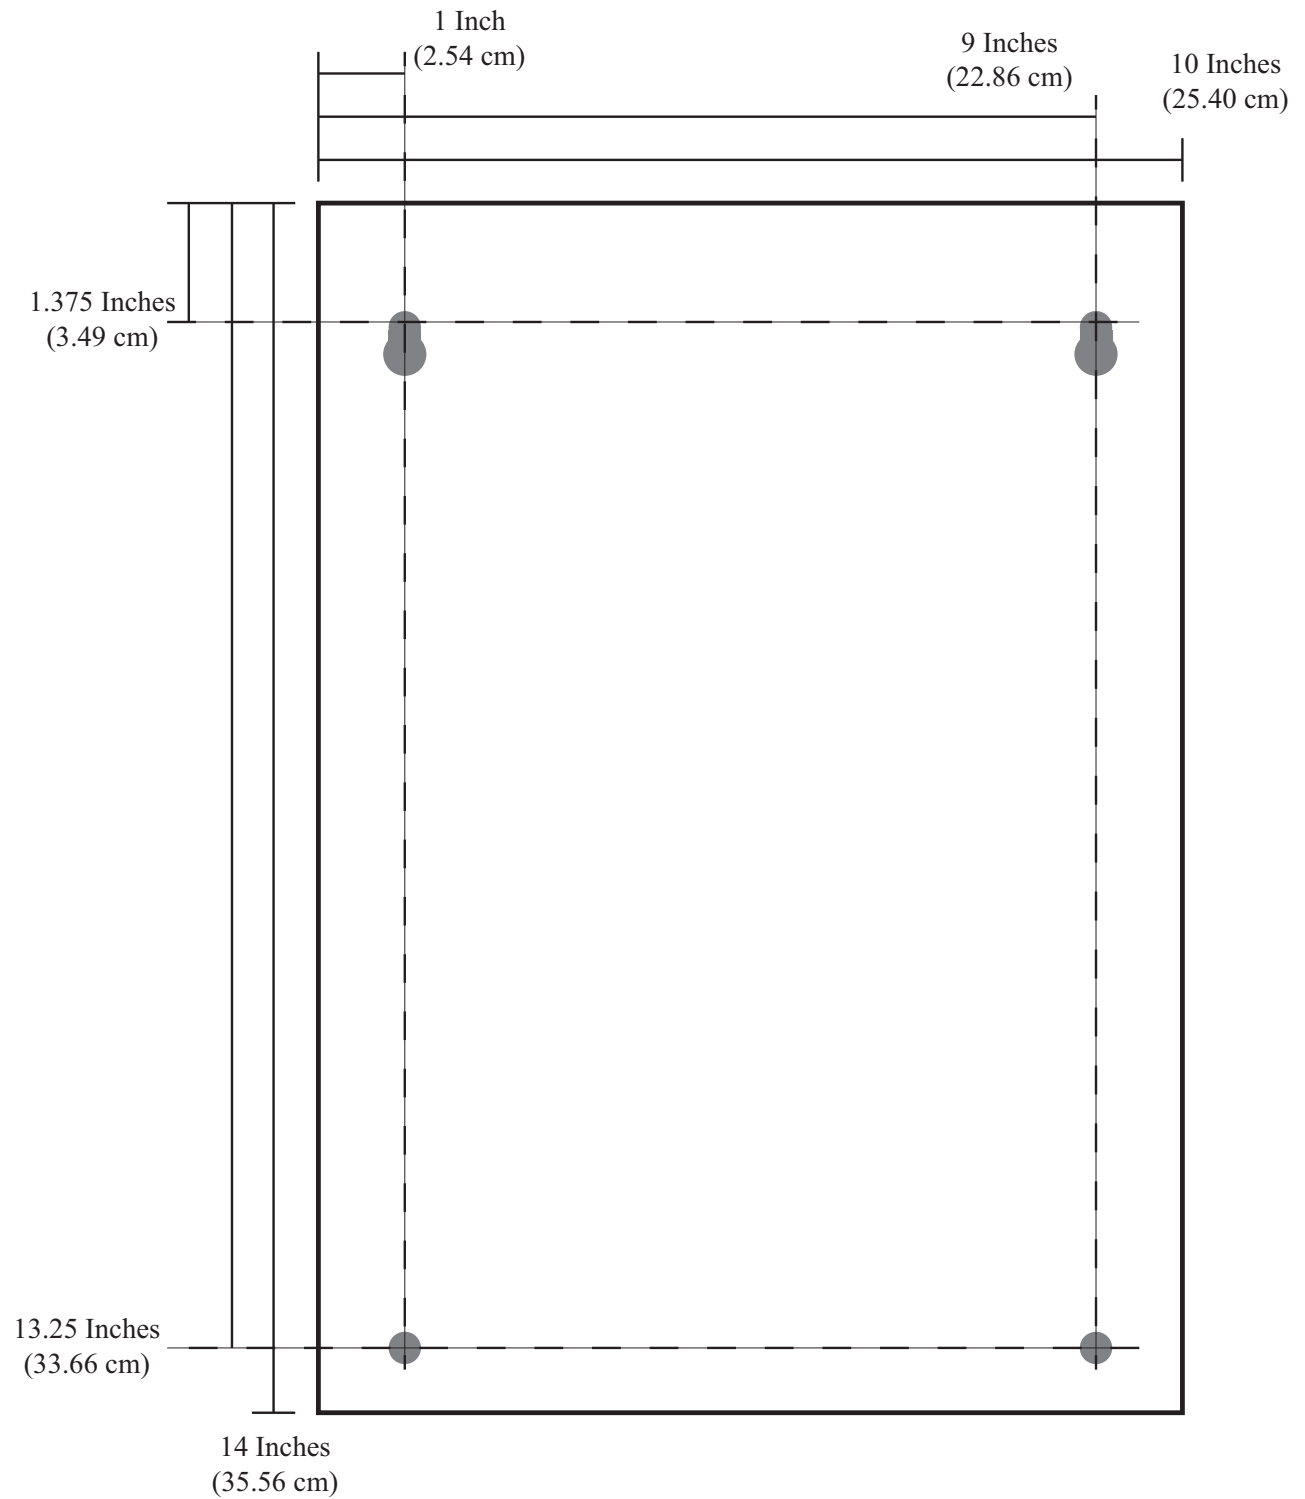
NPL II-48 Cabinet and Auxiliary Relay Cabinet Mounting Hole Locations
